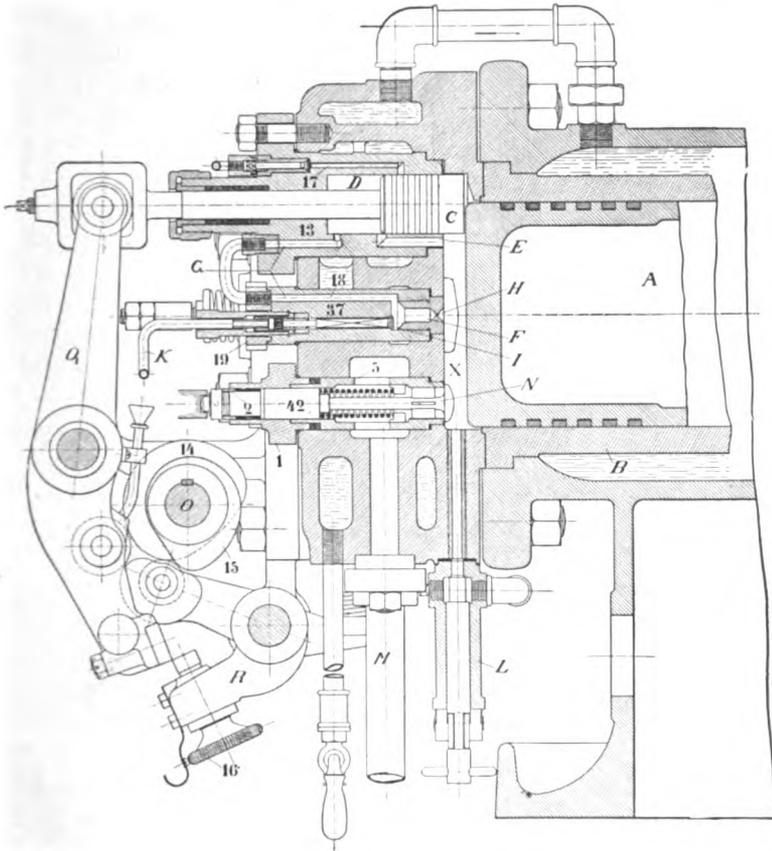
The Trinkler (Kocring) Oil Engine.
